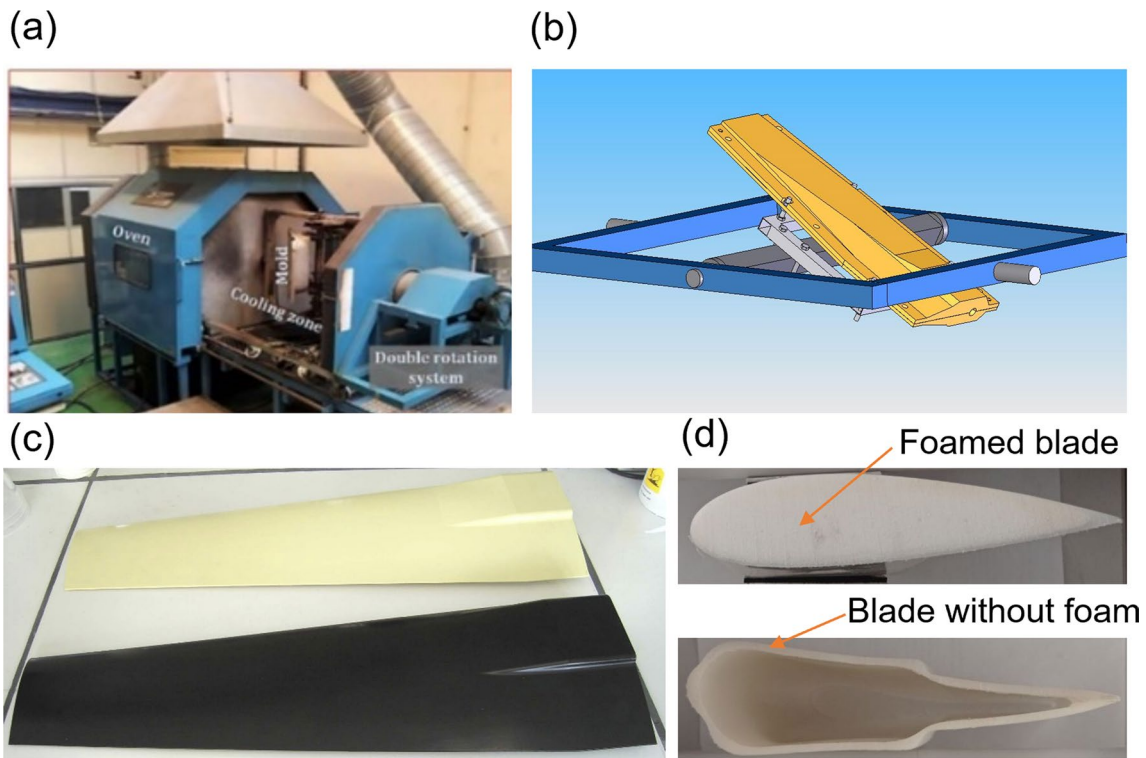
a Rotational molding machine LAB 40, b assembled design of the mold, c rotationally molded polyurethane wind turbine blades, and d view of cross-section cut of wings with and without foam
